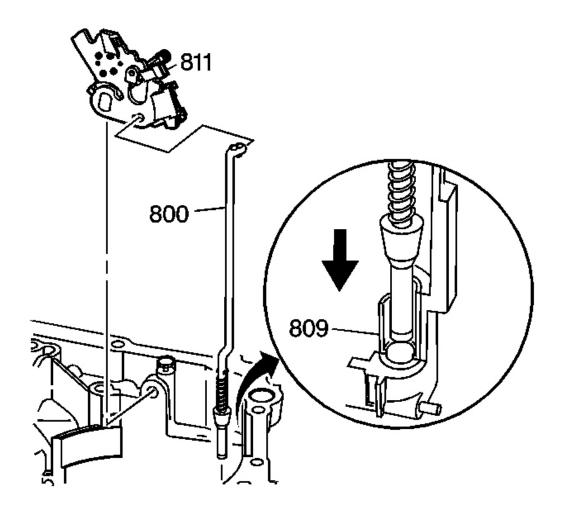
Expanded View Of Park Pawl Actuator Assembly Courtesy of GENERAL MOTORS CORP.
